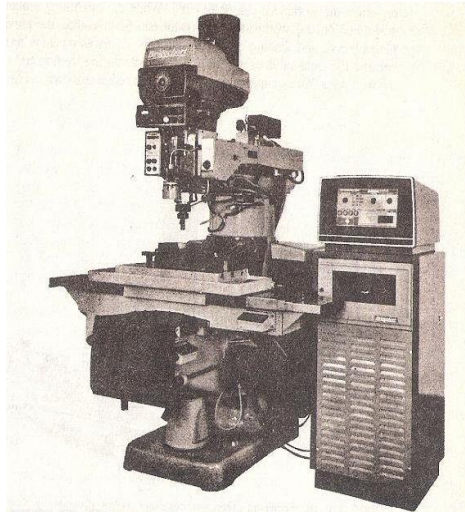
NC system showing machine tool and controller. (Courtesy of Bridgeport Machines Division of Textron Inc.)
